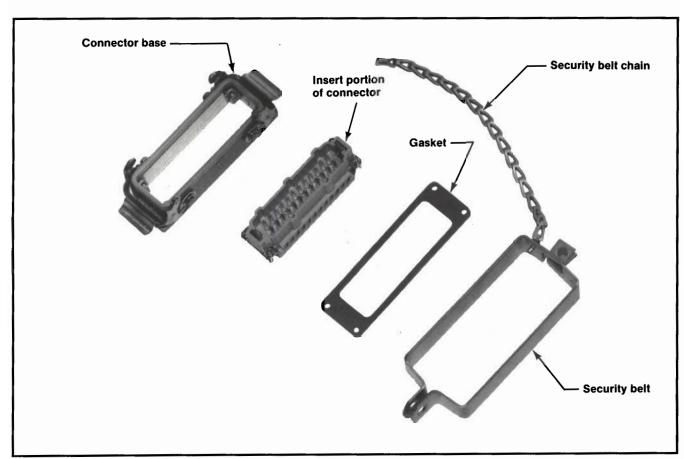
Panel-mount style connector for attachment of shielded control cable.
